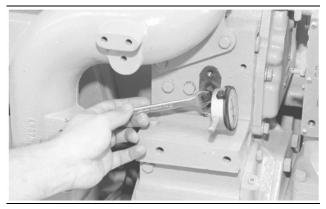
g00323705 Adjustment of the fuel setting screw (typical example)
